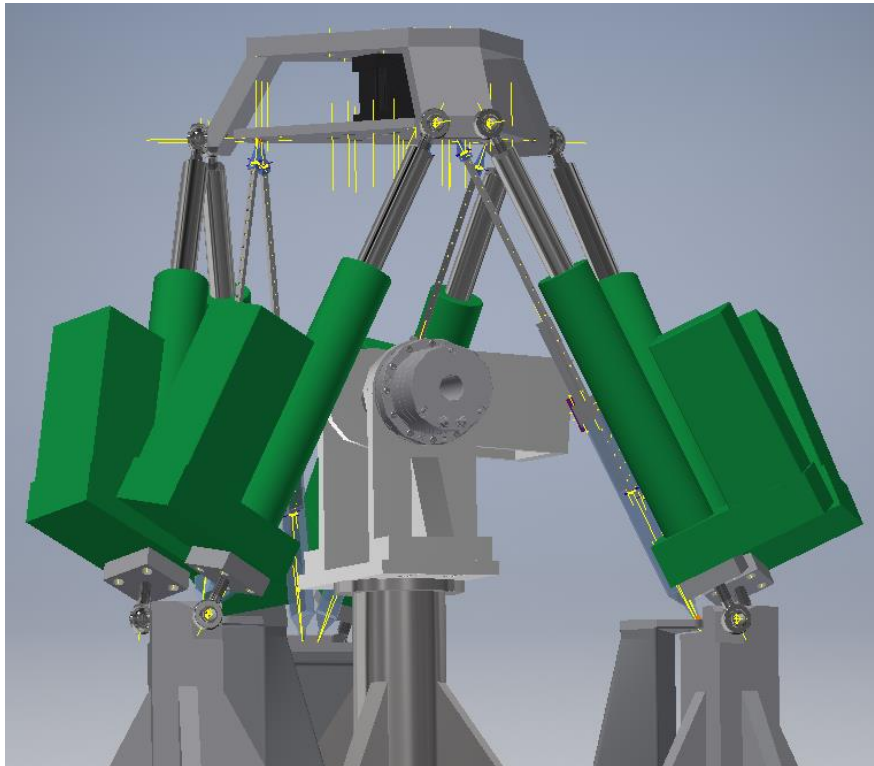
The hexapod, cradle and SHA actuator assembly.
